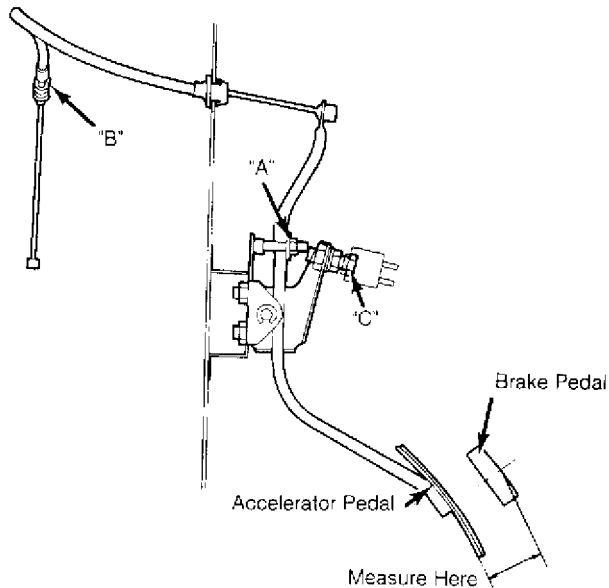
Adjusting Accelerator Cable and Pedal Height
